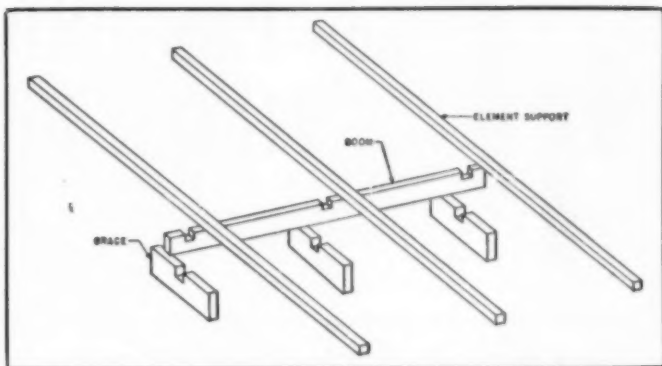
"Exploded" view of the antenna frame showing how parts are assembled.
